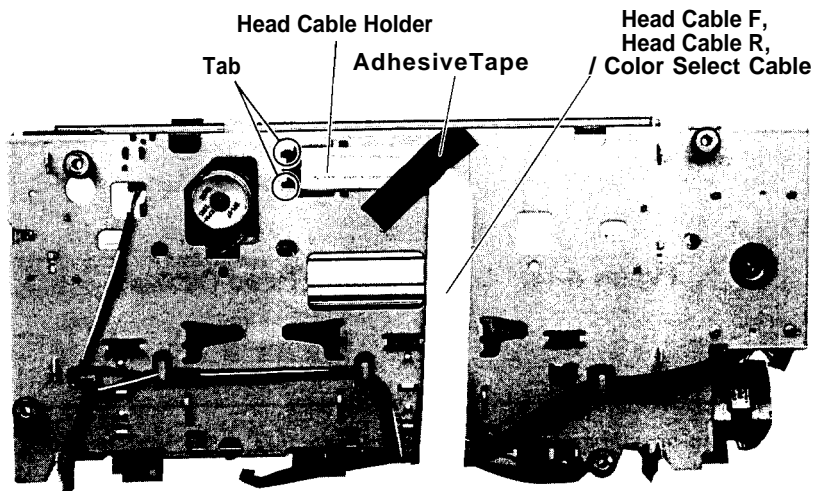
Head Cables (F and R) and Color Select Cable Removal (bottom view)
